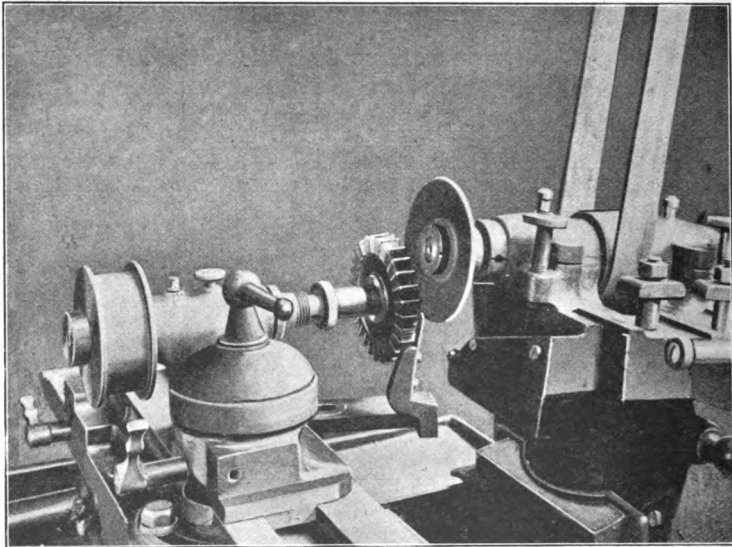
"Guest" Grinder Sharpening a Face-Cutter.
